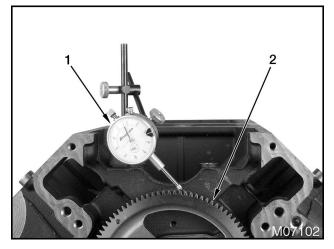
Camshaft assembly gear backlash check (camshaft gear to crankshaft gear)
